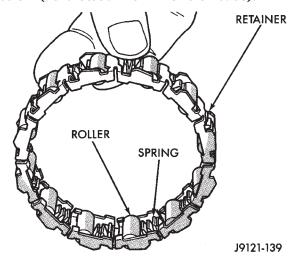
Overrunning Clutch Rollers, Springs, Retainer
